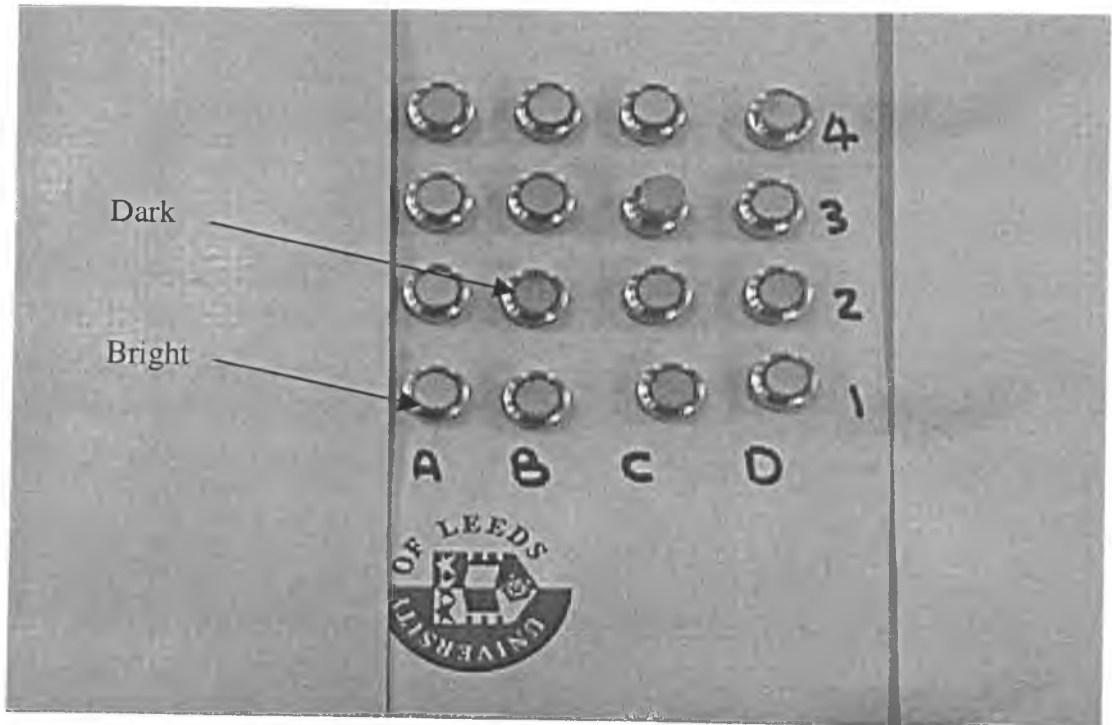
Fracture surfaces of horizontally cut samples processed using default furnace cycle in a Lindberg Furnace
